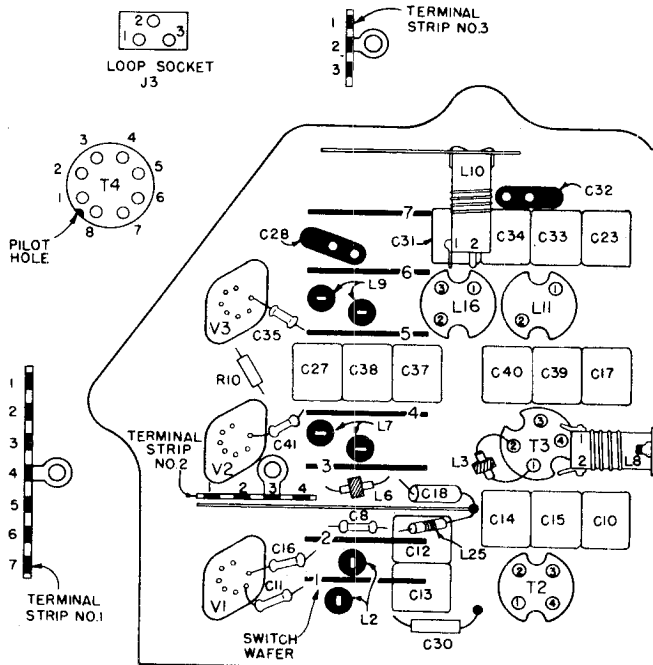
Physical Location of Components Listed in Band Switch Wiring Table
